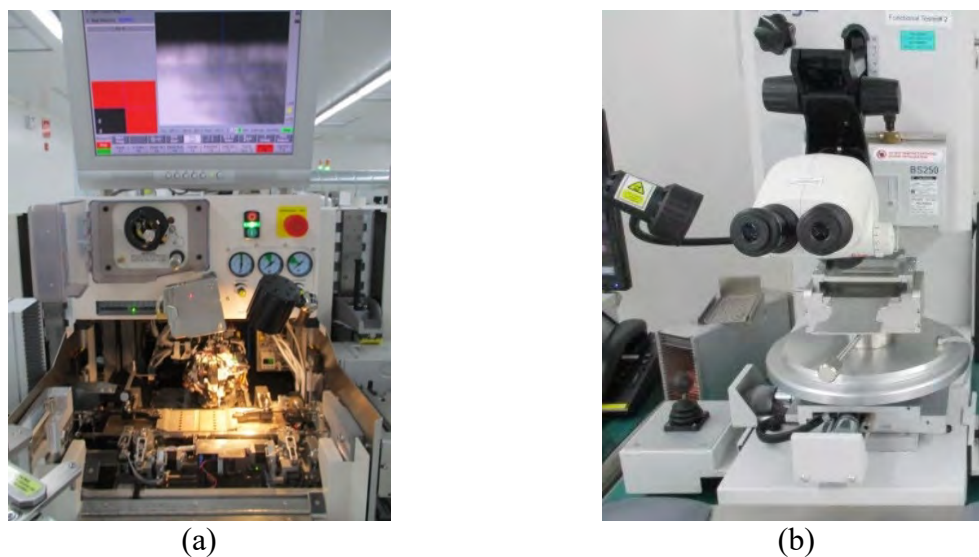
(a) Wire bonding machine, (b) the shear testing machine.
